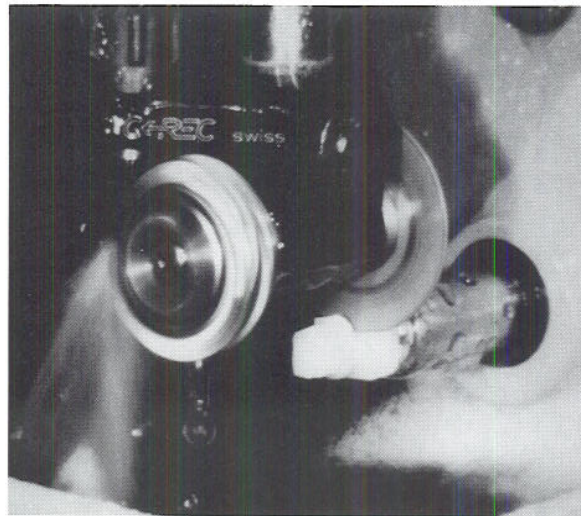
Milling of the piece of ceramic with the hydraulic motor.
